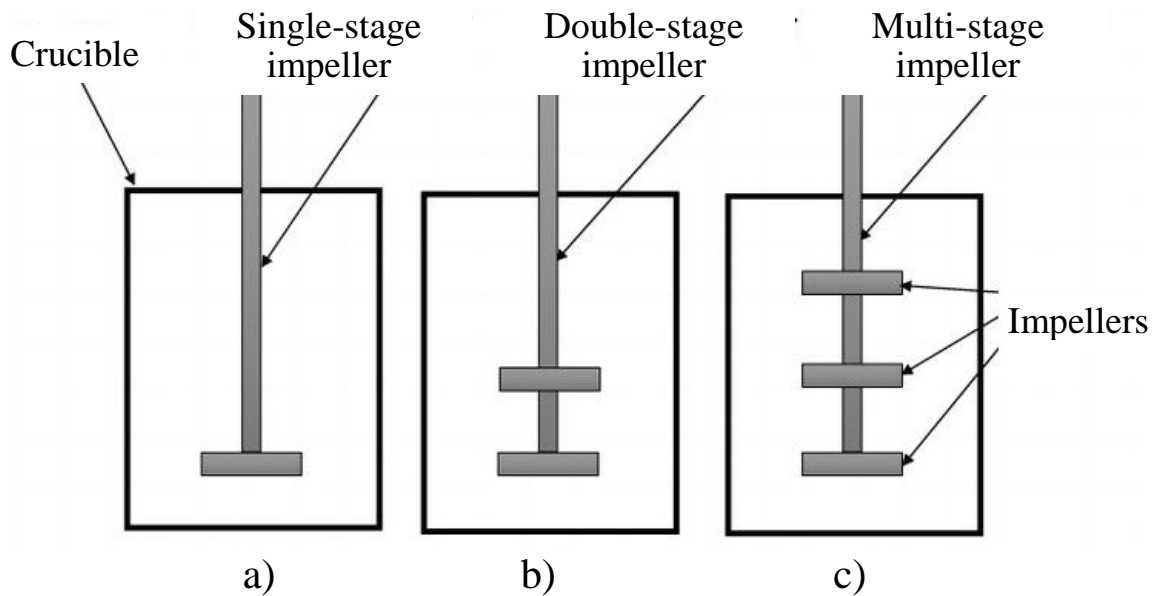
Single stage impeller stirrer (a), double stage impeller stirrer (b), multistage impeller stirrer (c)
